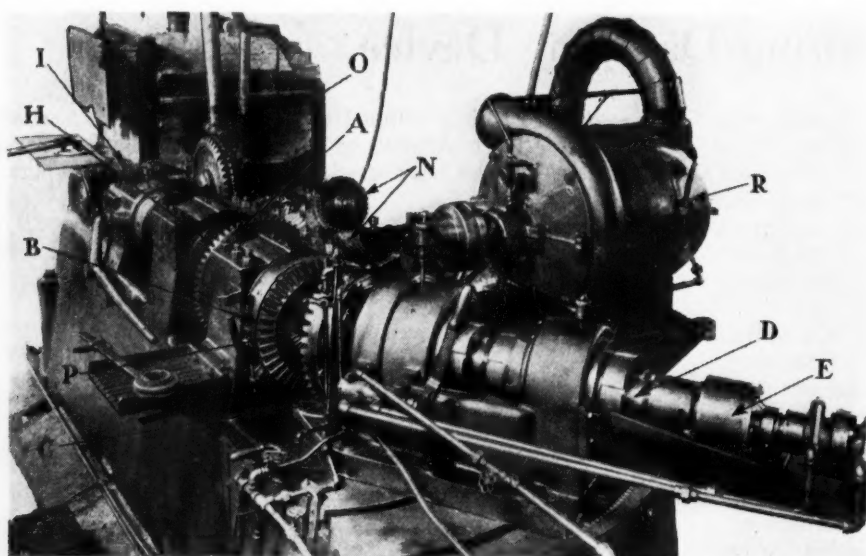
Front view of the Anderson machine for hot rolling bevel gears with 30 to 90 deg. angle. Fig. 2—Detail of same machine showing timing gears, die, rolled blank and blank holder
